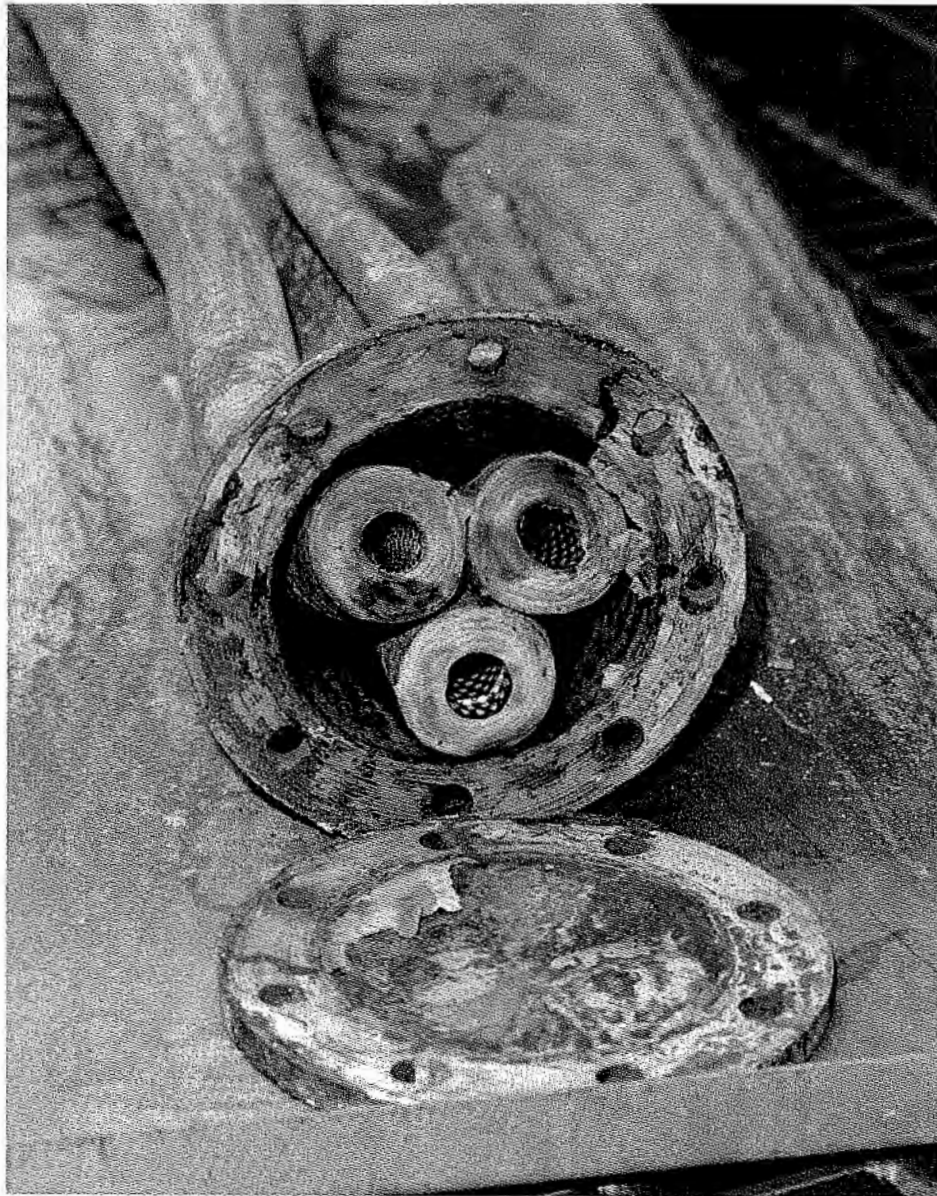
Close up View of the Inner Container Cover, Flange and Enclosed Filter Assemblies.
